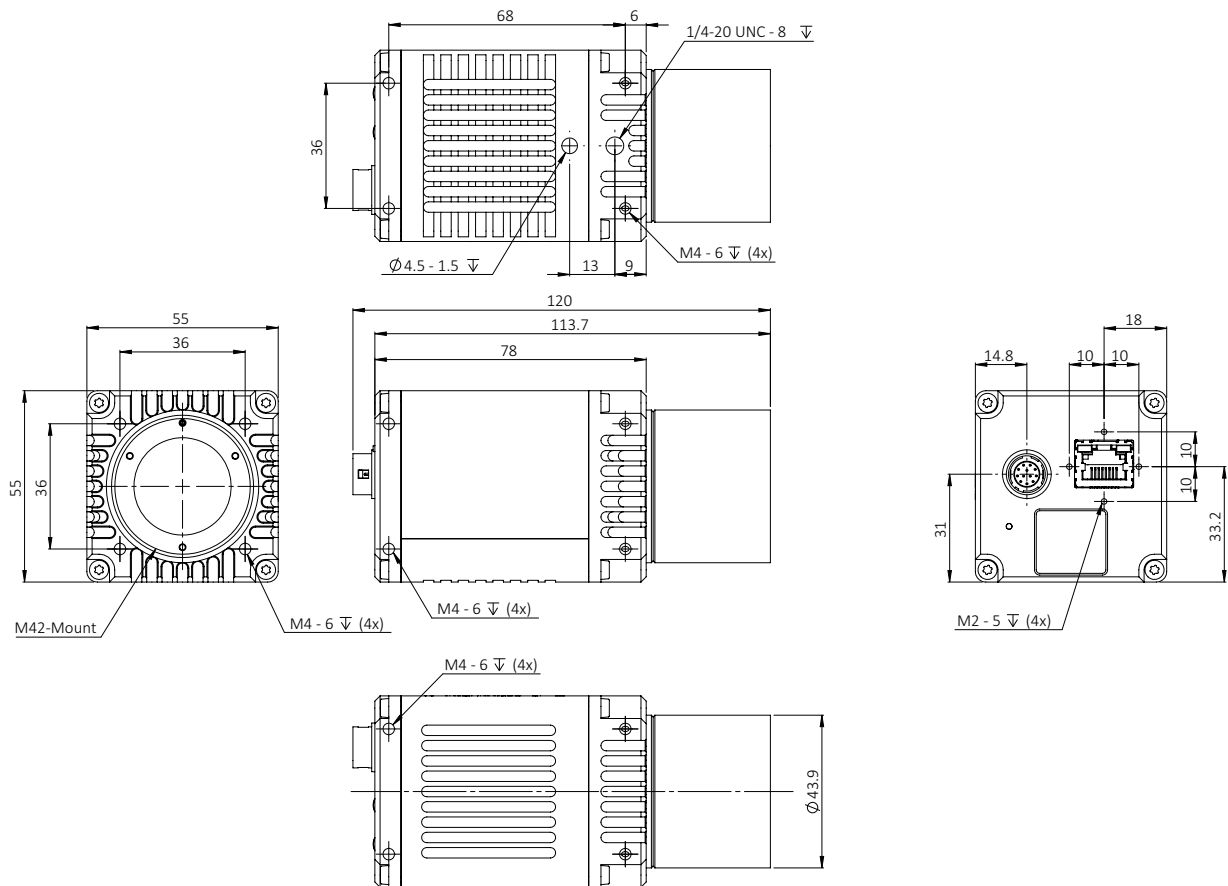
Goldeye G-034 SWIR TEC1 with M42-Mount adapter
